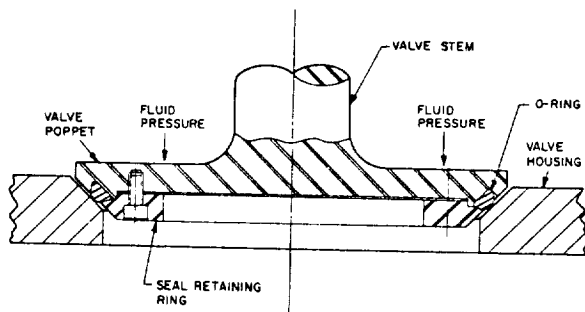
Typical valve seat O-ring seal design for poppet-type valves.
